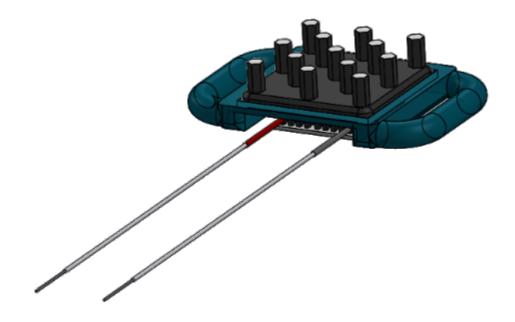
Orthographic view of full TEM, heat sink, and fixture assembly.
